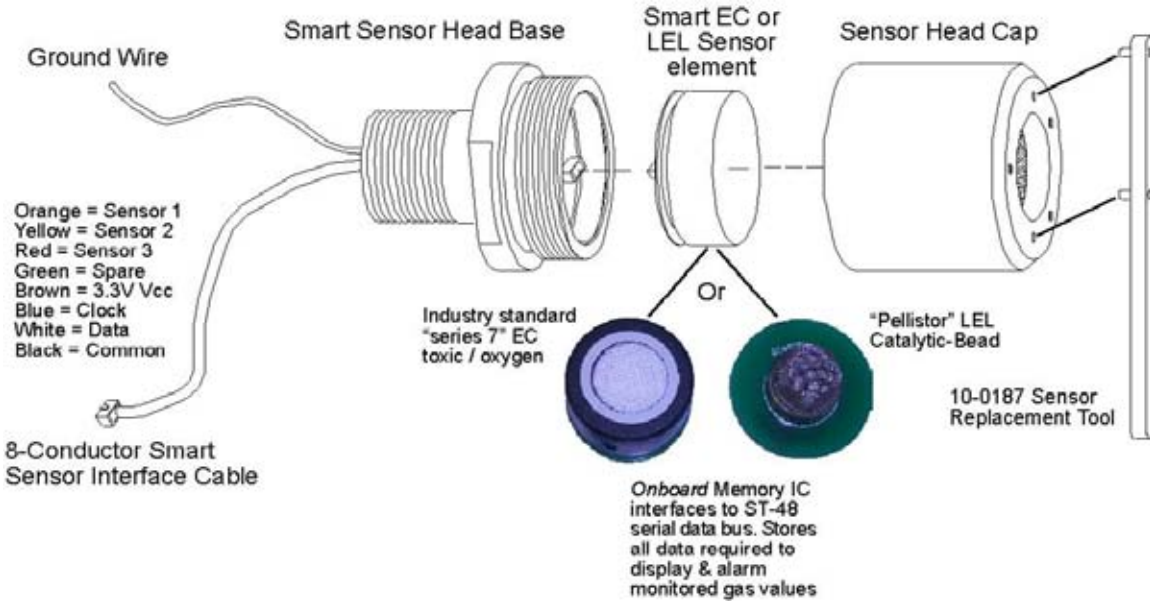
10-0247 Smart Sensor Head Assembly
